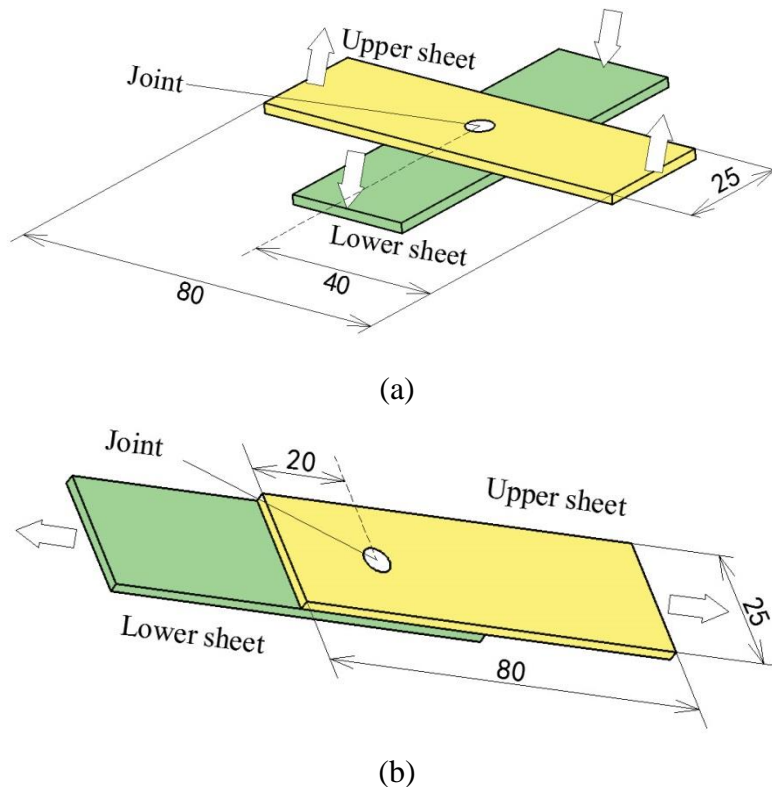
Joined sheets used for cross-tensile and tension-shearing tests: (a) Specimen used for cross-tensile test; (b) Specimen used for tension-shearing test
